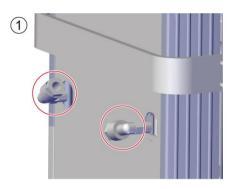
Angle fittings on intake/pressure Fig. 8.4 – Housing shell fasteners sides
